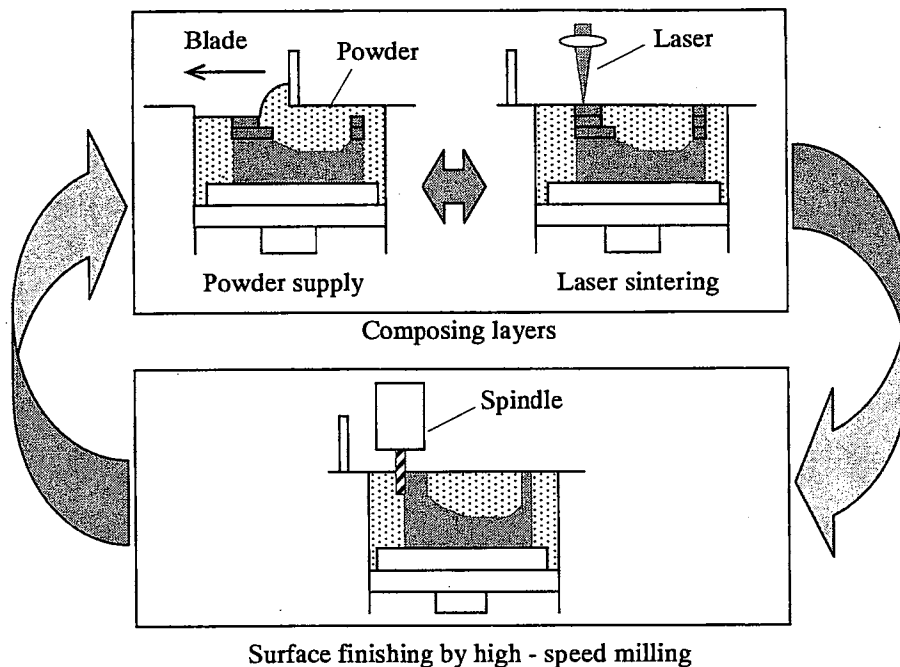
Concept of Milling-Combined Laser Metal Sintering process
